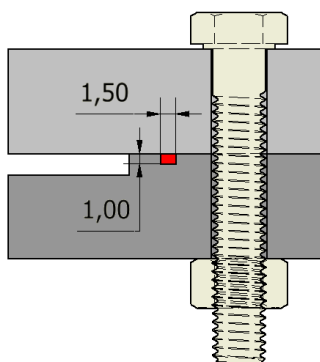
Cross section view of the groove of an indium seal. Light gray: the upper flange, dark gray: the lower flange in which the groove is milled, red: the groove is 1.5 mm wide and 1.0 mm deep, beige: bolt and nut.
